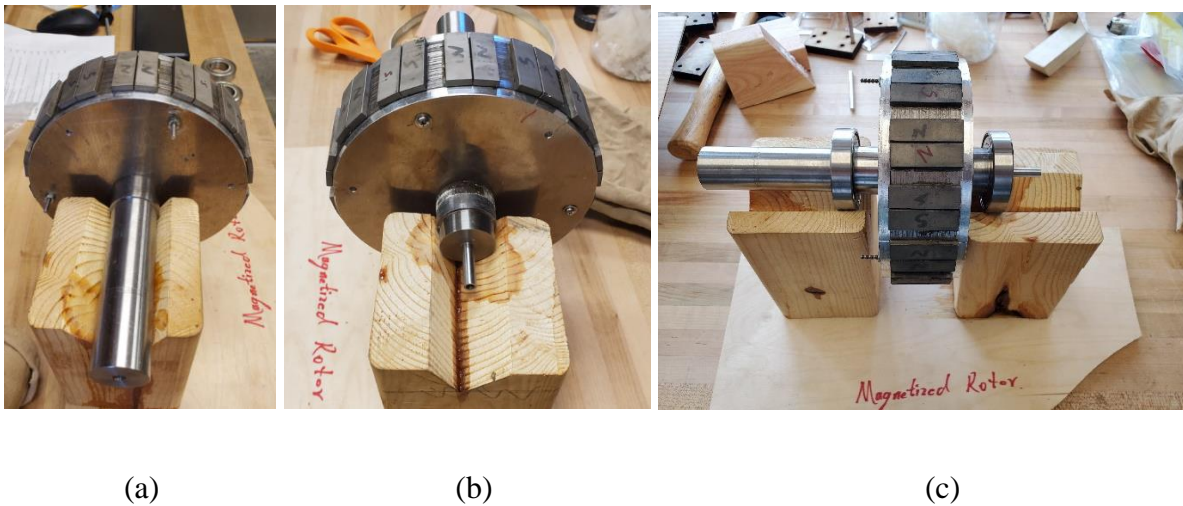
Rotor Assembly (a) Without Bearing (Front) (b) Without Bearing (Back) (c) With Bearing
